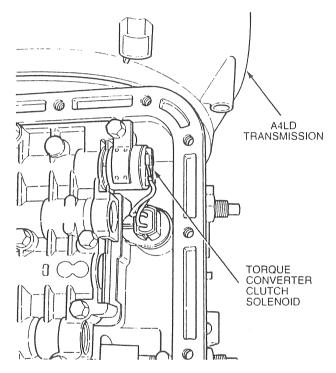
Torque converter clutch solenoid. (Courtesy of Ford Motor Co.)
